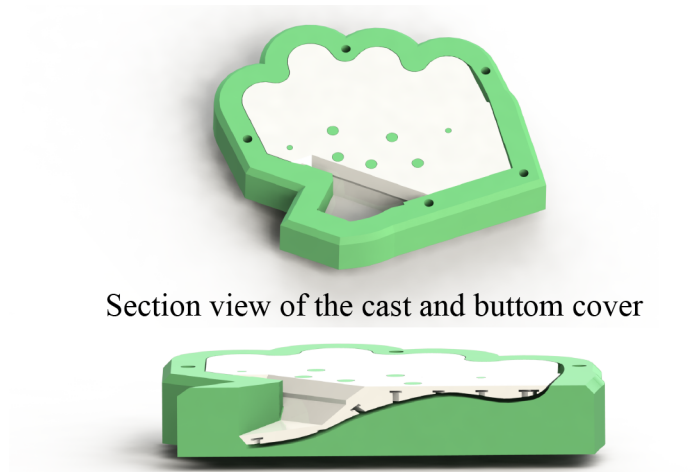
Bottom cover of the palm and its insert molding cast.
